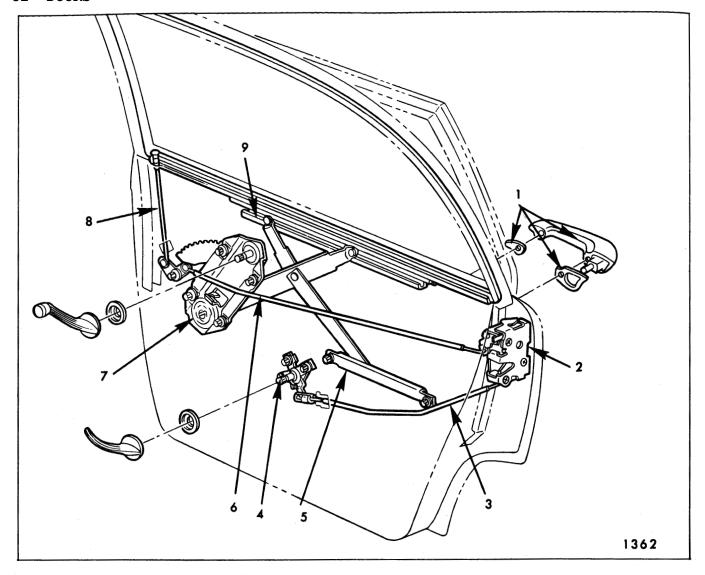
Rear Door Hardware - "A" Closed Styles
